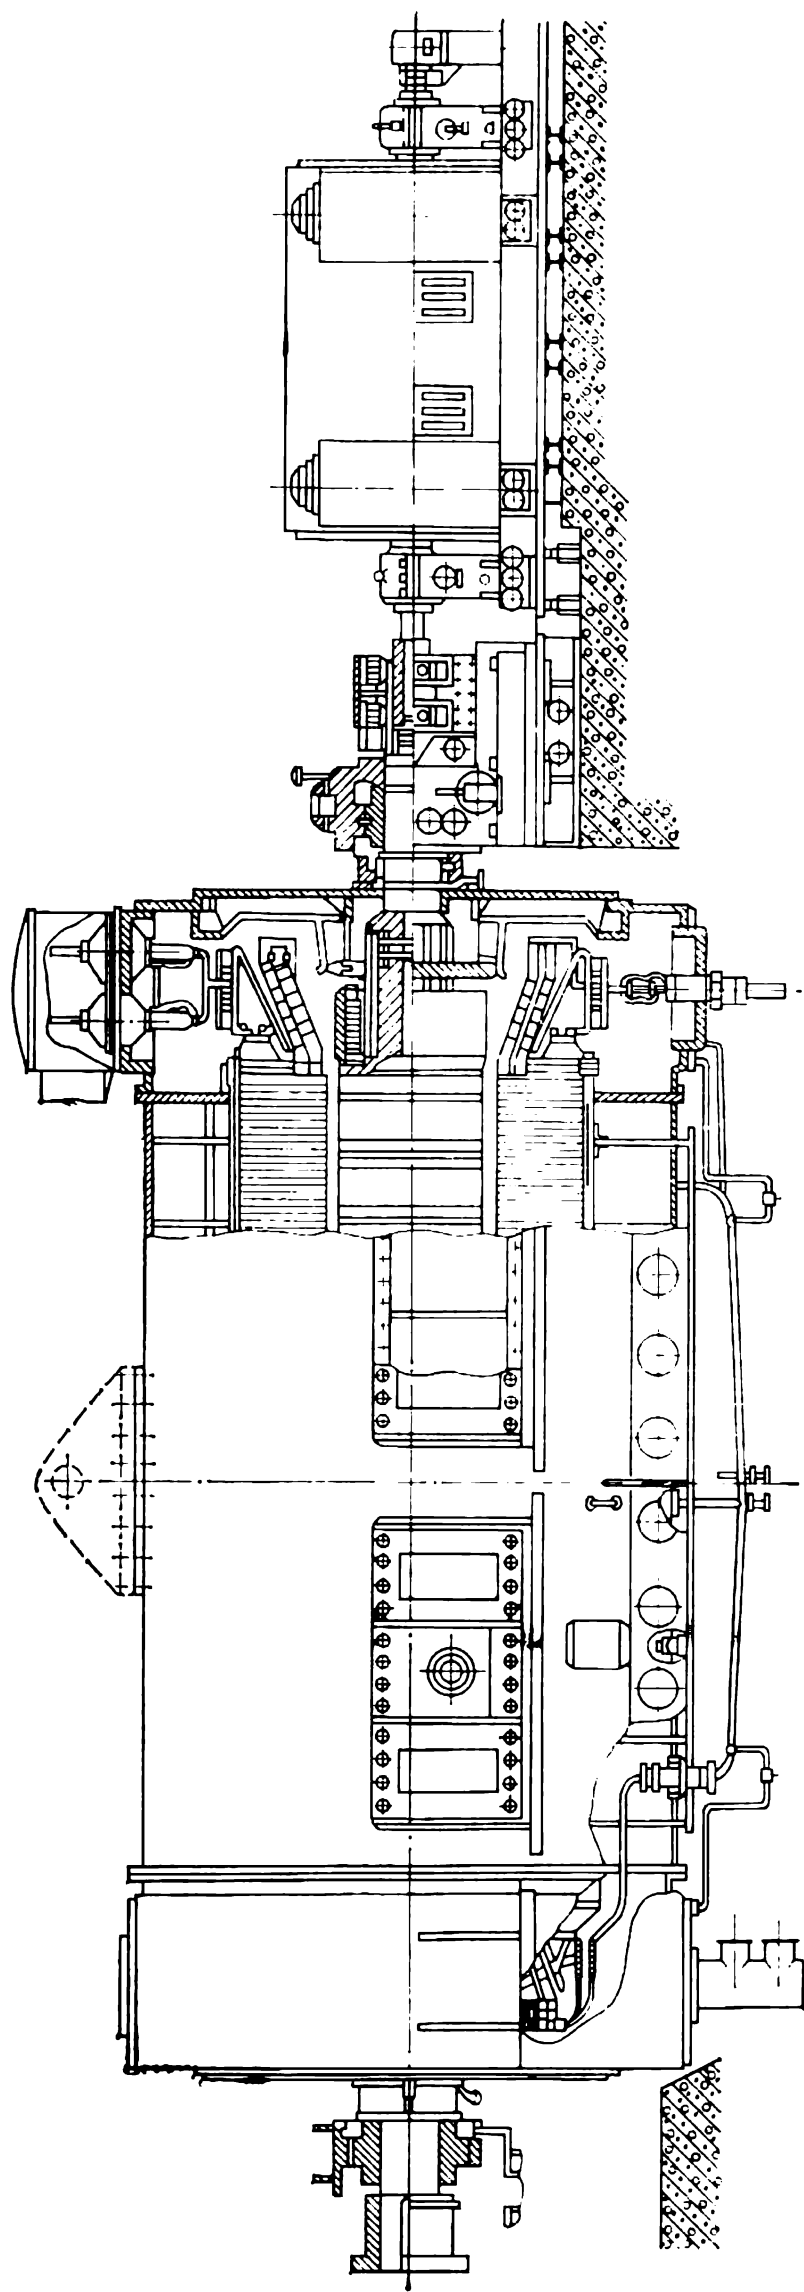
Turbogenerator with the stator windings directly cooled by water and the rotor winding cooled by hydro-
